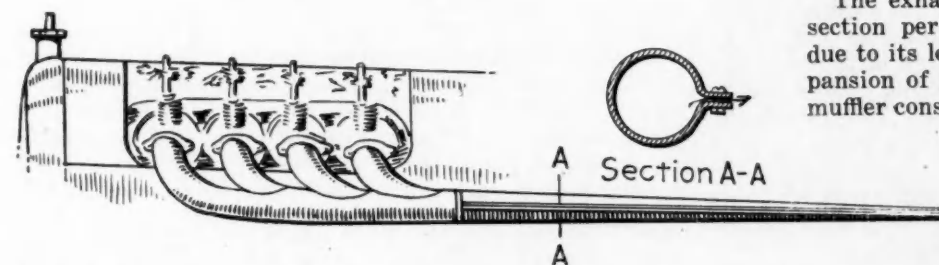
CURTISS TYPE MUFFLER ON R-4 MACHINE AND FIG. 8—SECTION A-A SHOWING THE SLOT
